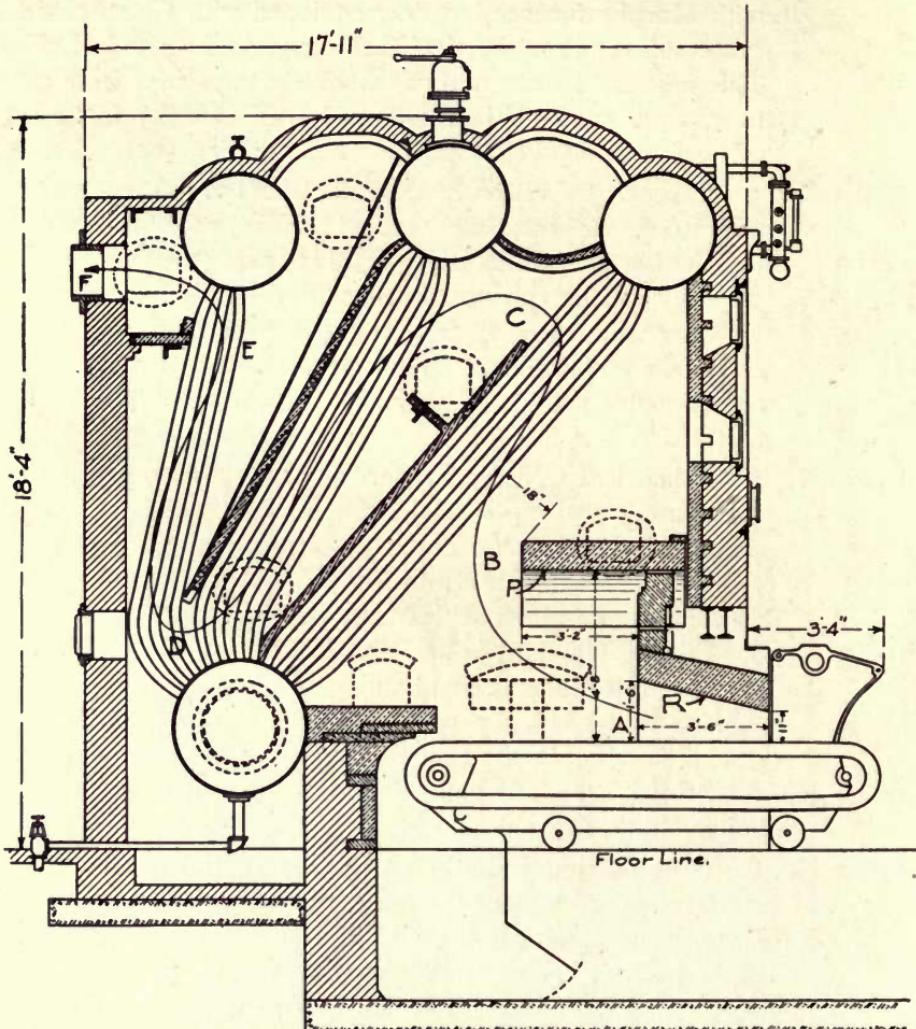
STIRLING STANDARD 260 H. P. BOILER EQUIPPED WITH CHAIN GRATES
